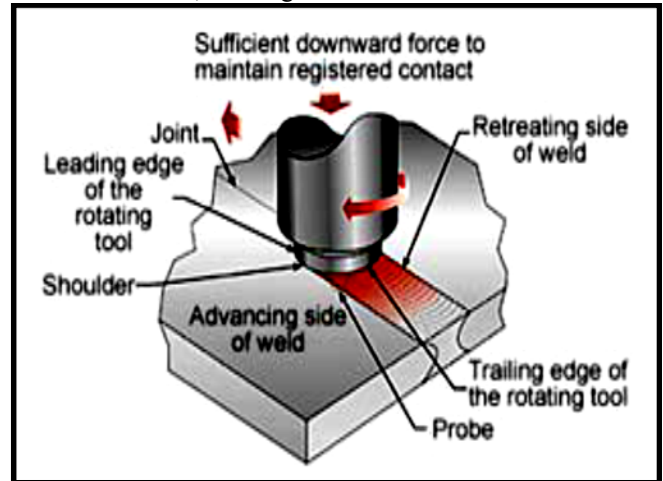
Schematic diagram of the Friction Stir Welding process [2]
